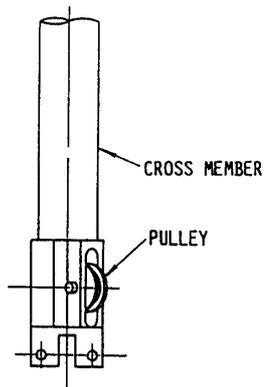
The Fixed-Hinge-Assembly for Nodes 5 and 7 of Fig. 1.
